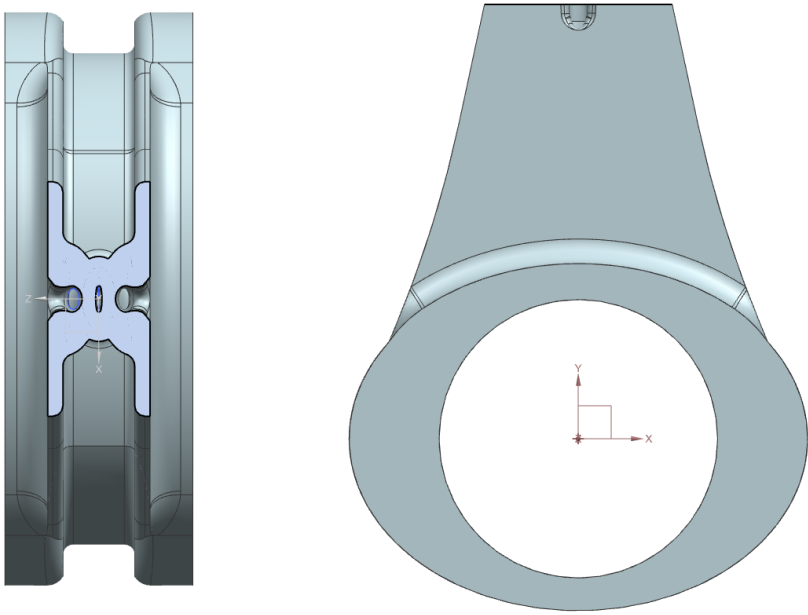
Cross-section of 2.1 beam; upper middle beam section.
